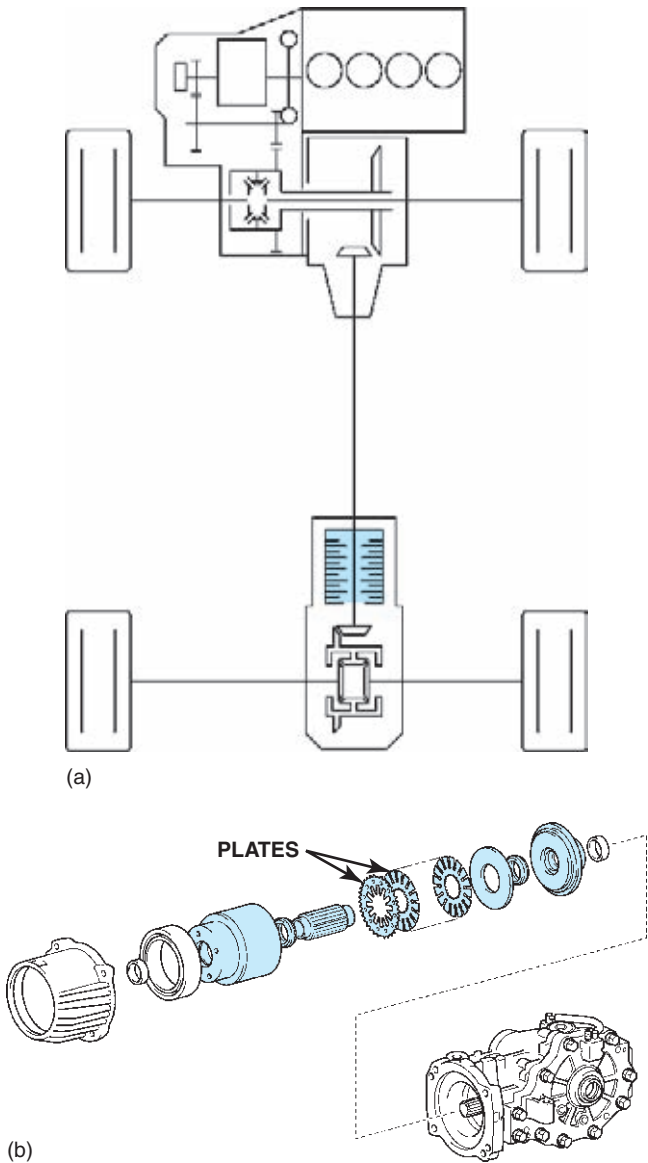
This AWD vehicle uses a viscous coupler at the rear drive axle (a). The exploded view of the coupler shows some of the internal plates (b). (Courtesy of Toyota Motor Sales USA, Inc.)
